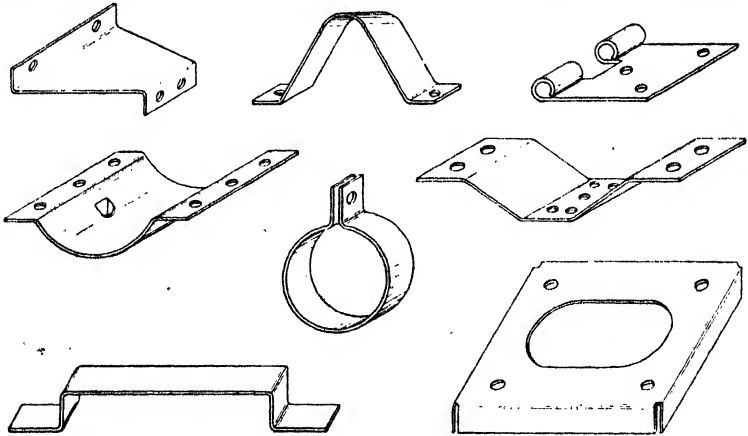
Examples of small- to medium-sized stamping (classification 5), all of which happen to be formed rather than drawn.
